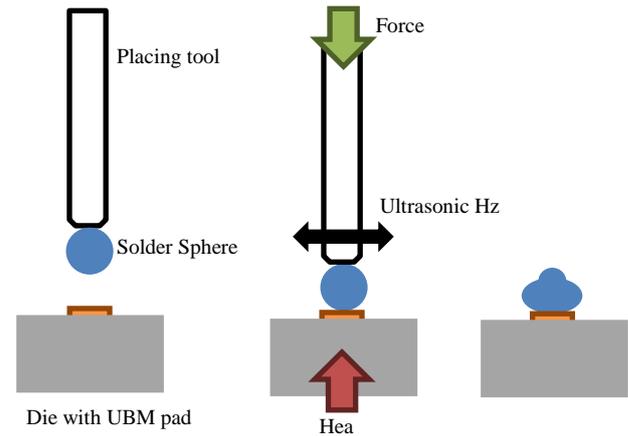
Schematic description of Thermosonic Assisted Solder Sphere Transfer
